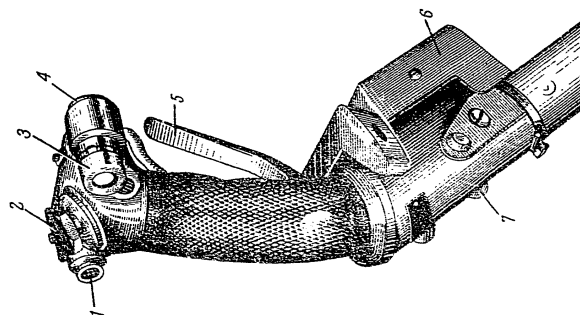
LEFT-HAND CONTROL STICK HANDLE
